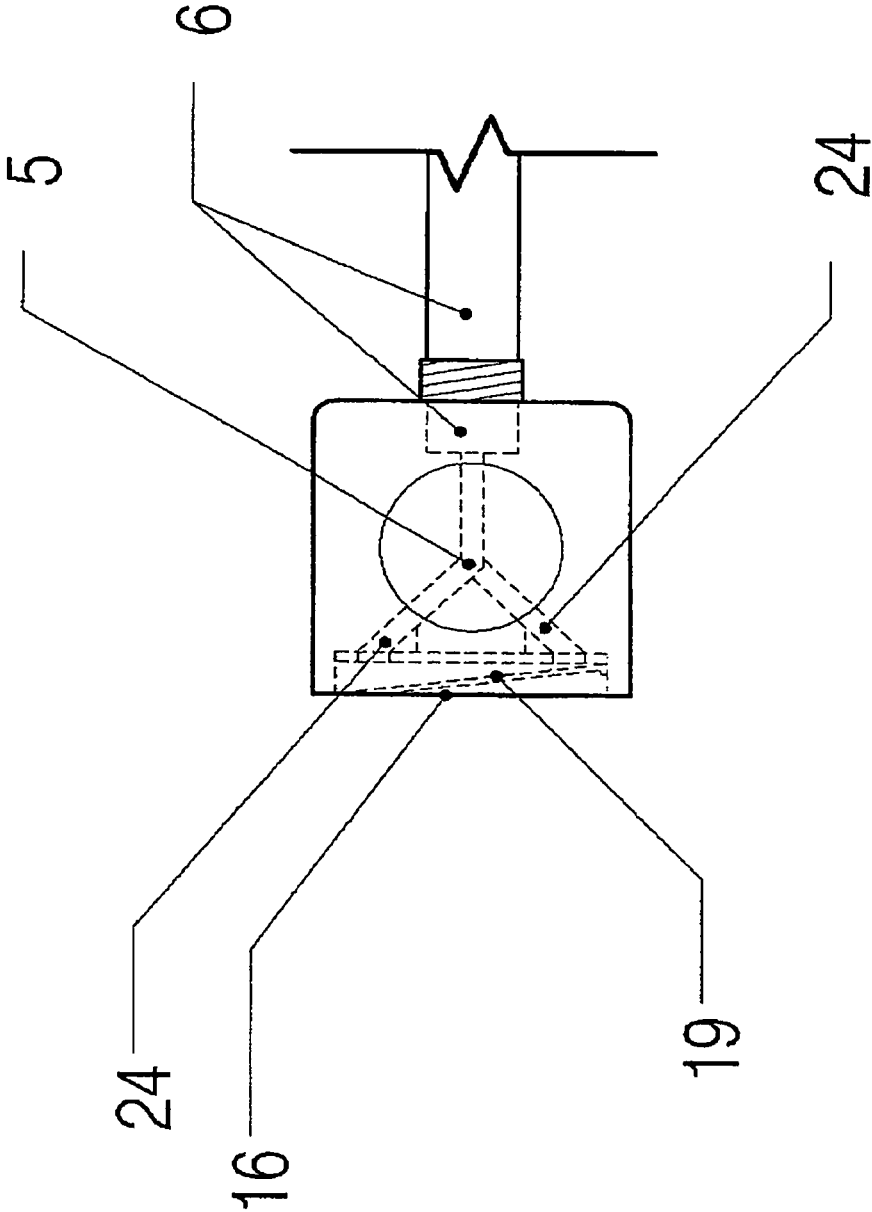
Right Side Cutaway View Of Ball Valve Assembly
